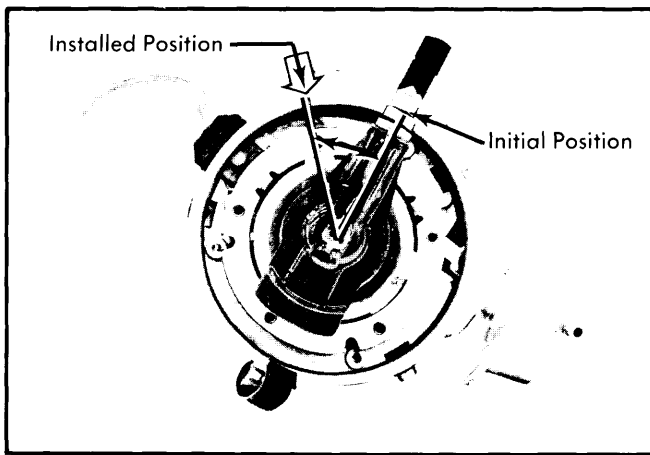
Distributor Rotor Position Prior to Final Positioning
